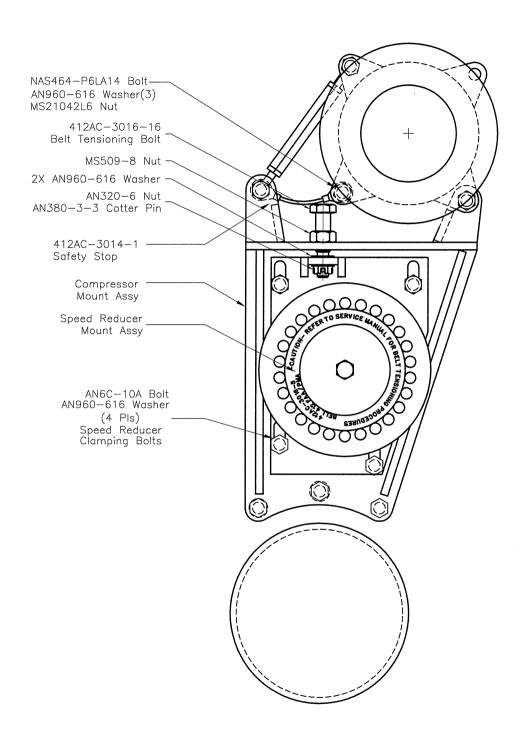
, 412 Air Conditioner Compressor Mount and Speed Reducer Assembly
